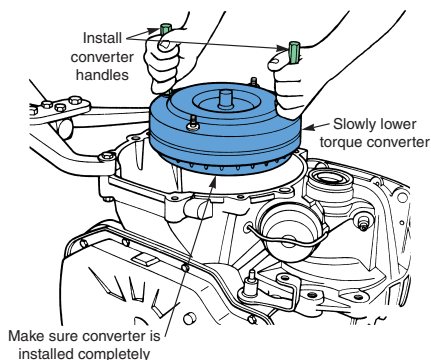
To install the torque converter, turn the transmission or transaxle until the turbine shaft faces up and lower the converter into place. Make sure the converter is completely installed over the shaft splines or it will bind and be damaged when the transmission or transaxle is reinstalled in the vehicle. (Ford)
